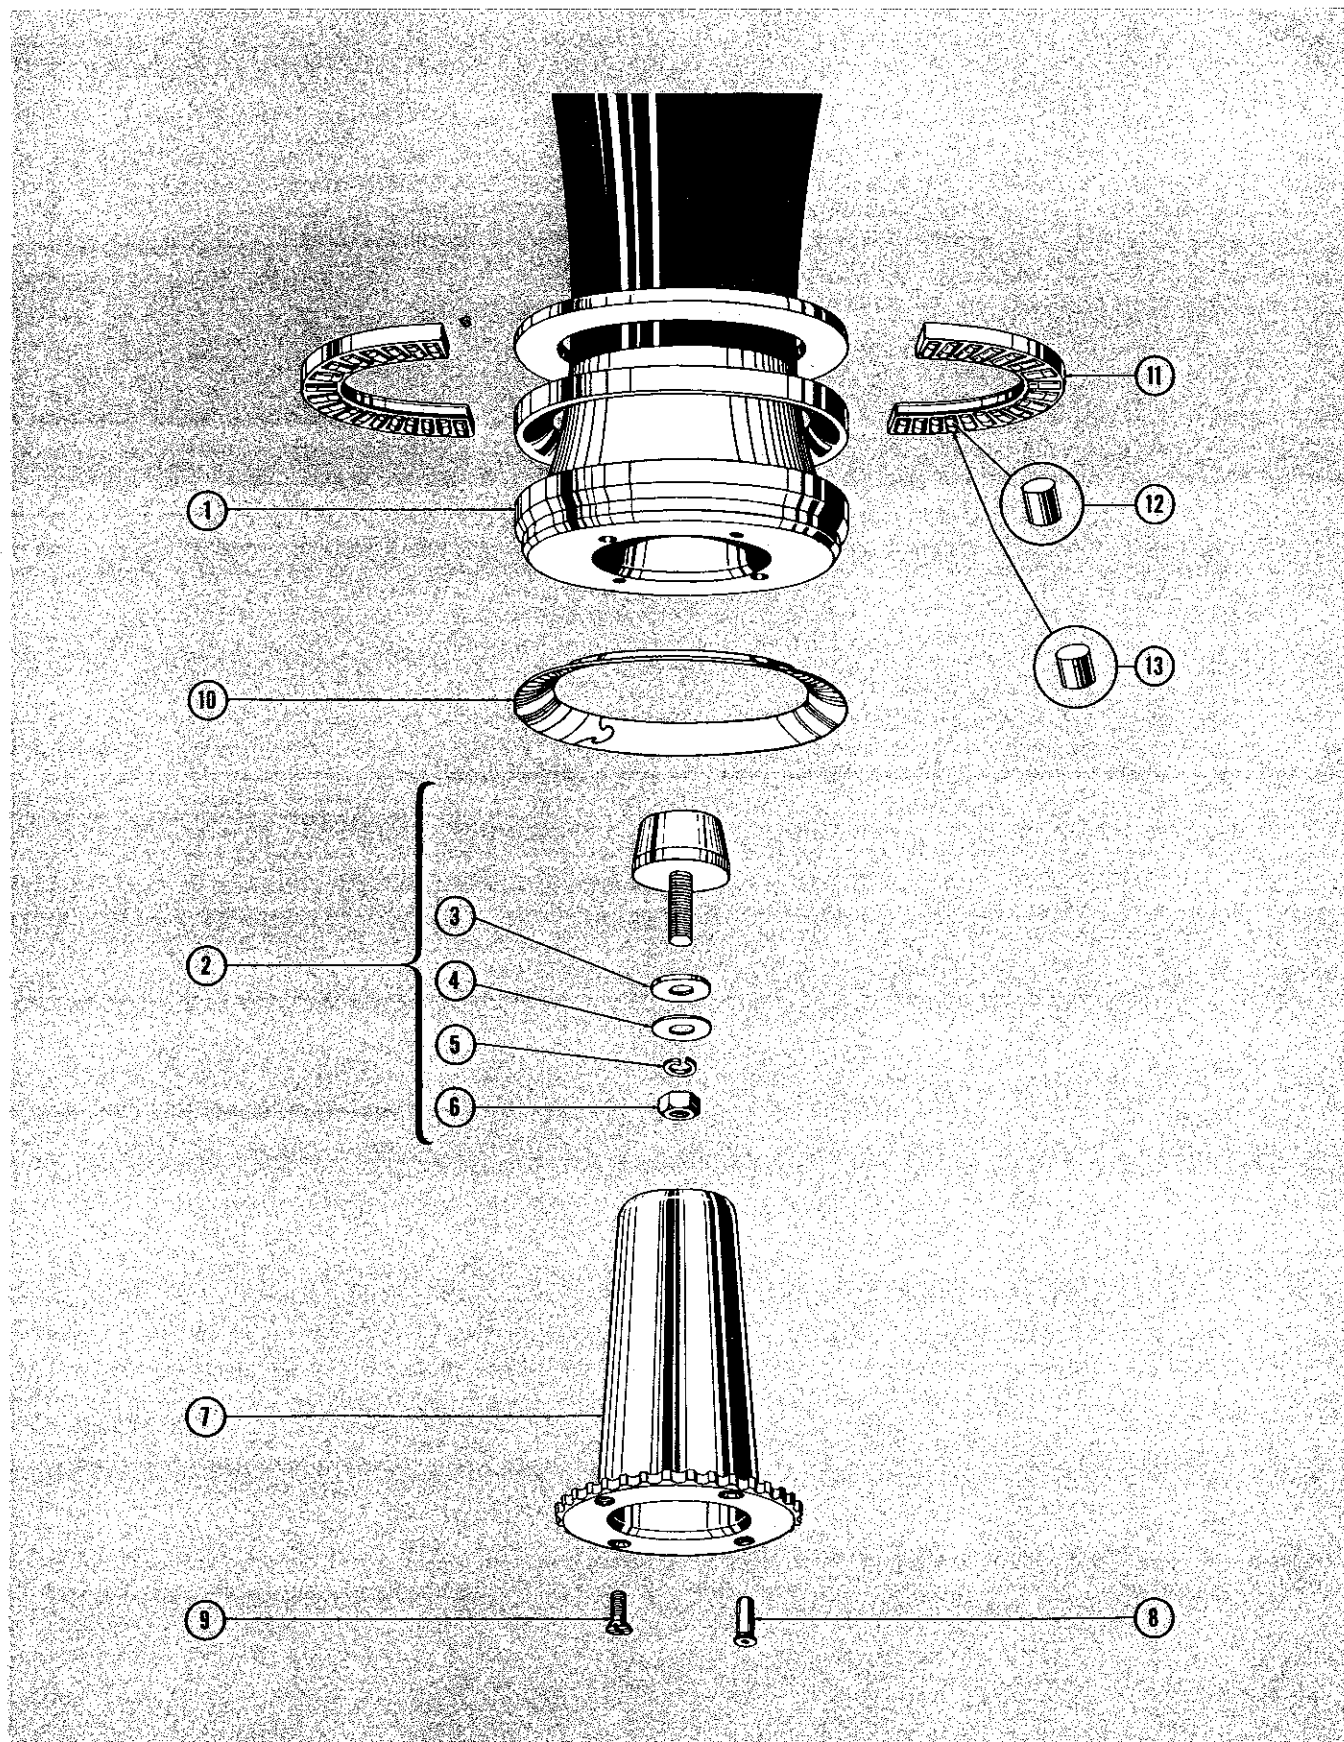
Counterweight Type "E" Shank Blade Assembly
